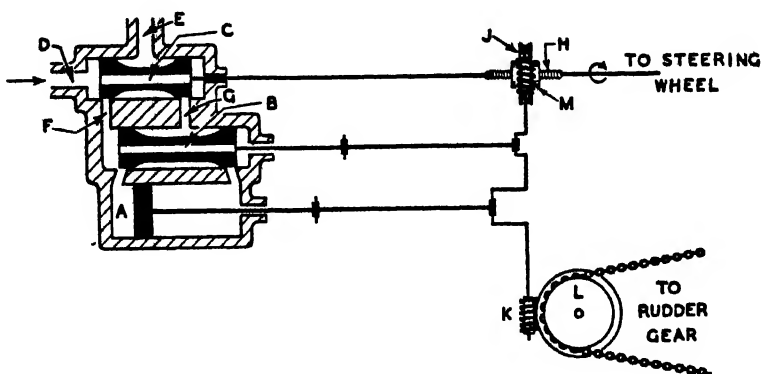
STEAM STEERING GEAR—FOLLOW-UP WITH SLOW RESPONSE
